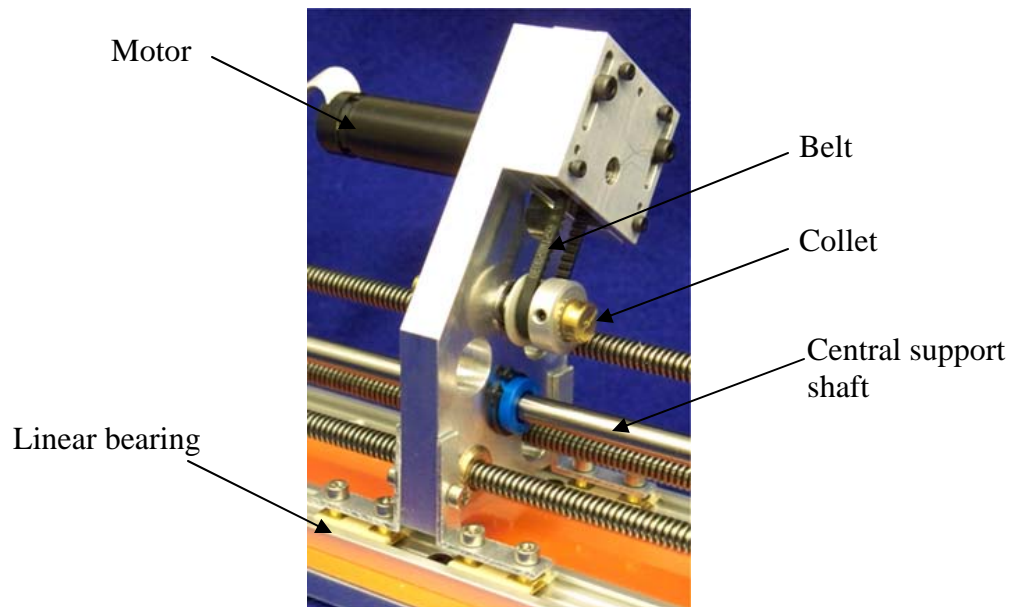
A close up of view of the carriage showing the attached motor and belt drive which turns a brass collet that grips a tube. Also pictured are the central support shaft and the linear bearing that slides on it and the two linear slides that support the bottom corners of the carriage.
